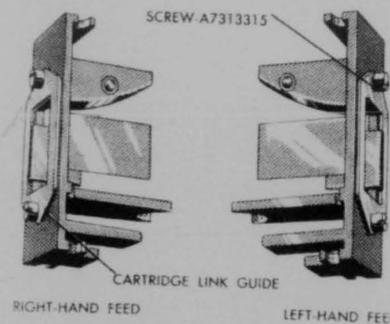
Link Chute Adapter Assembly (C7313314) Assembled for Right-Hand and Left-Feed Top View.
